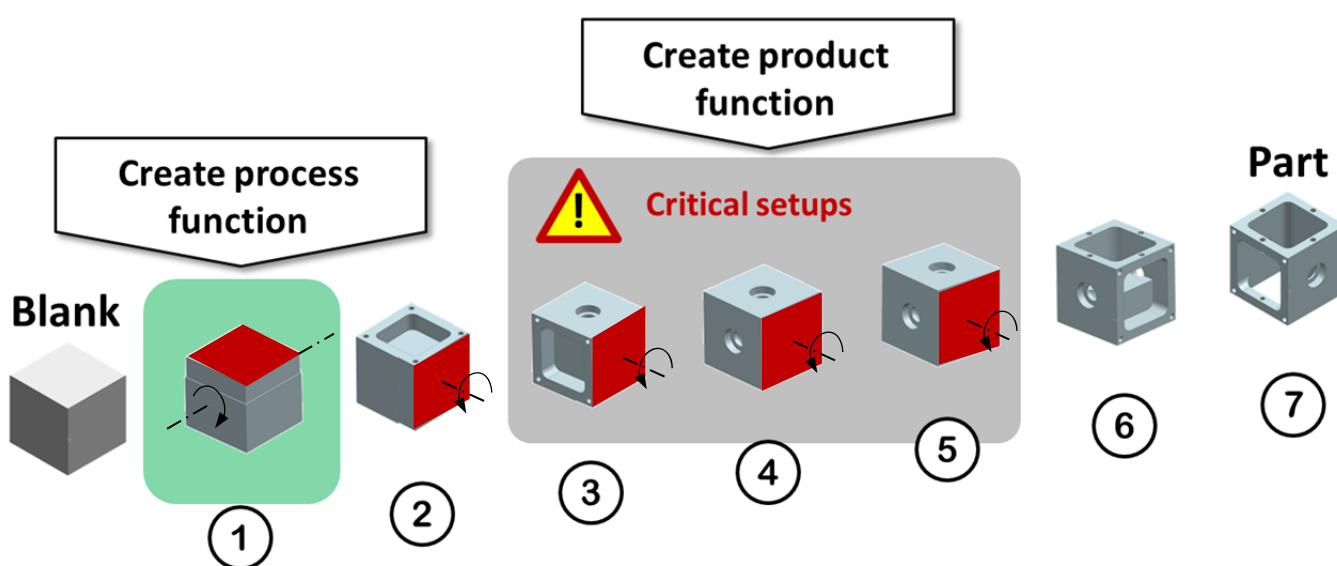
Process Plan layout for machining of the gear box housing in a 3-axis machine
